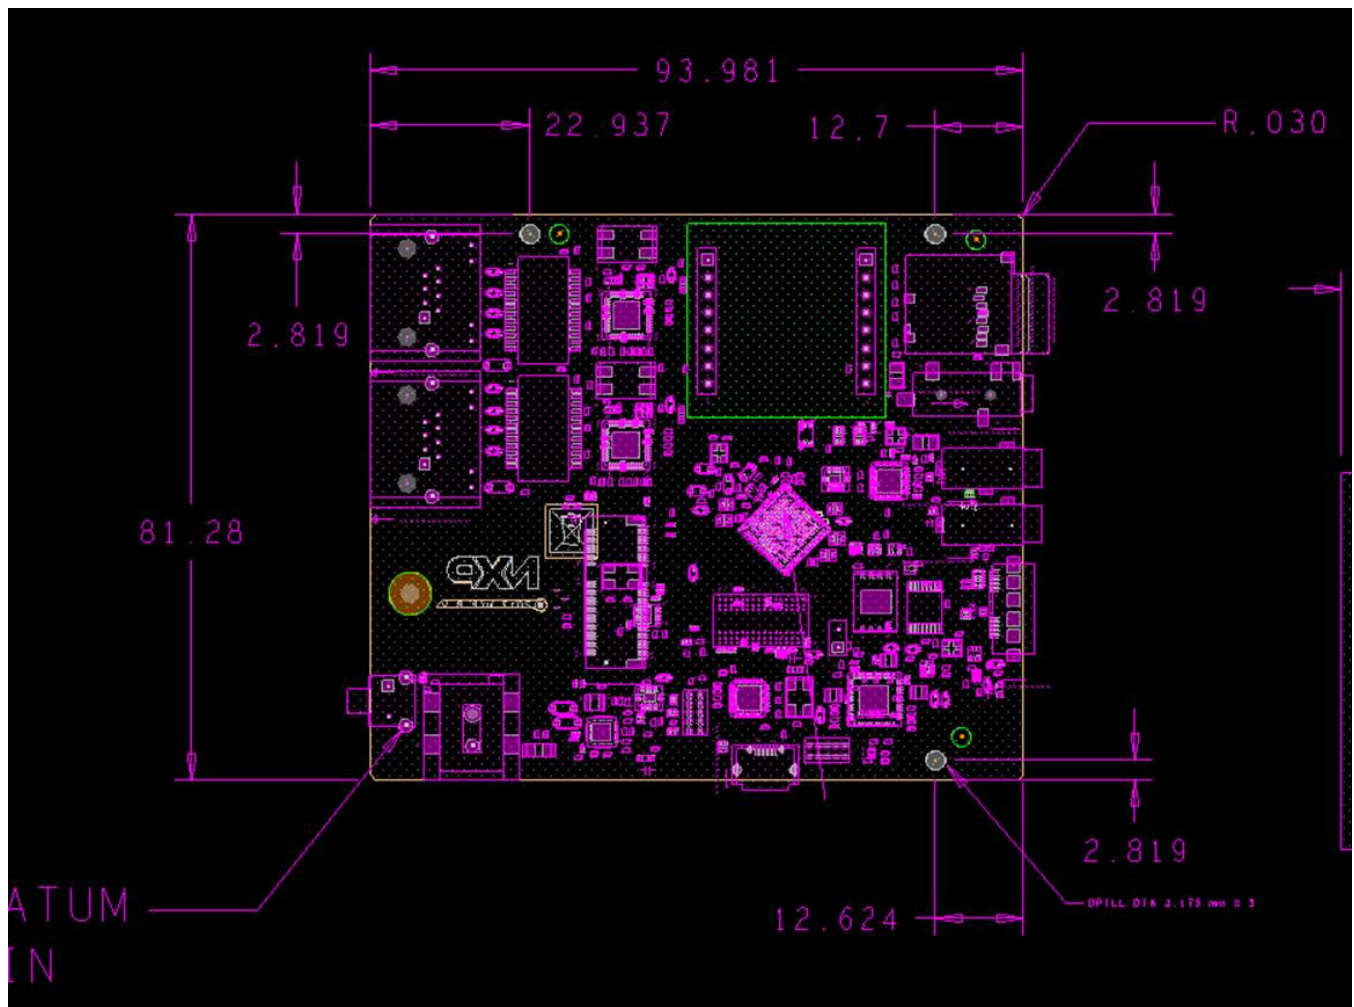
FRWY-LS1012A assembly layout (Dimensions are in 'mm')
